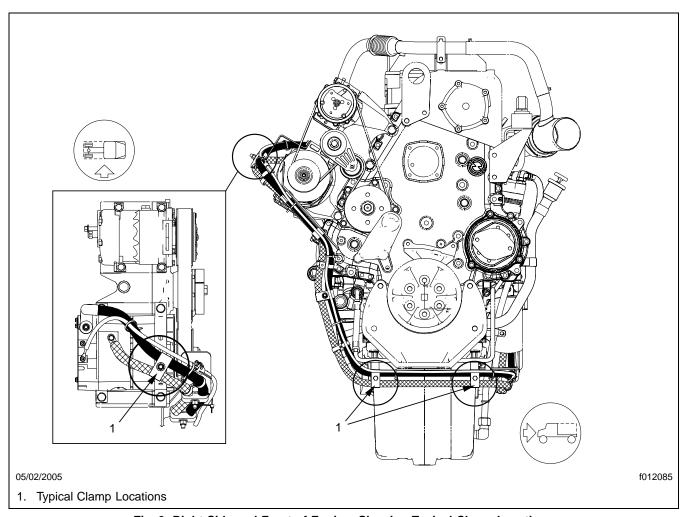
, Right Side and Front of Engine, Showing Typical Clamp Locations
